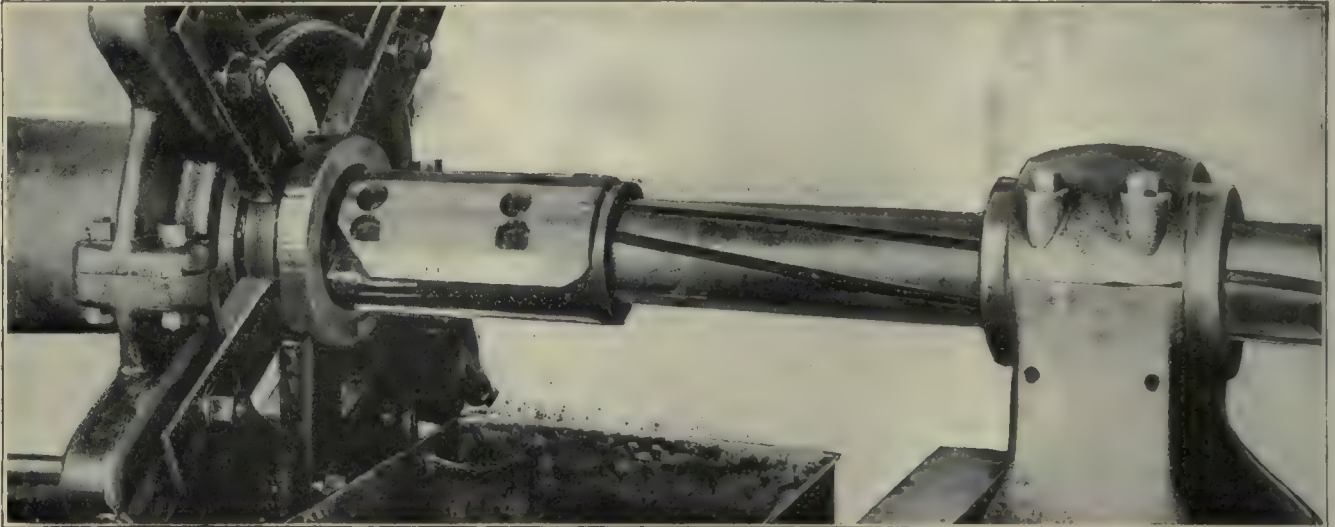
HOG-NOSE TOOL ABOUT TO ENTER THE TUBE
